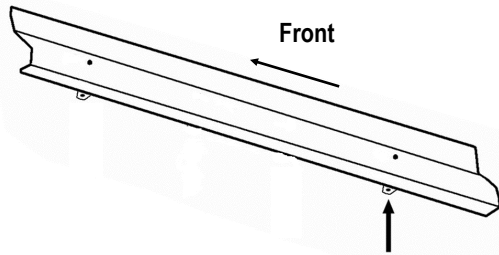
Passenger Front Mounting Bracket Installed (Models with welded nut/ threaded insert)
